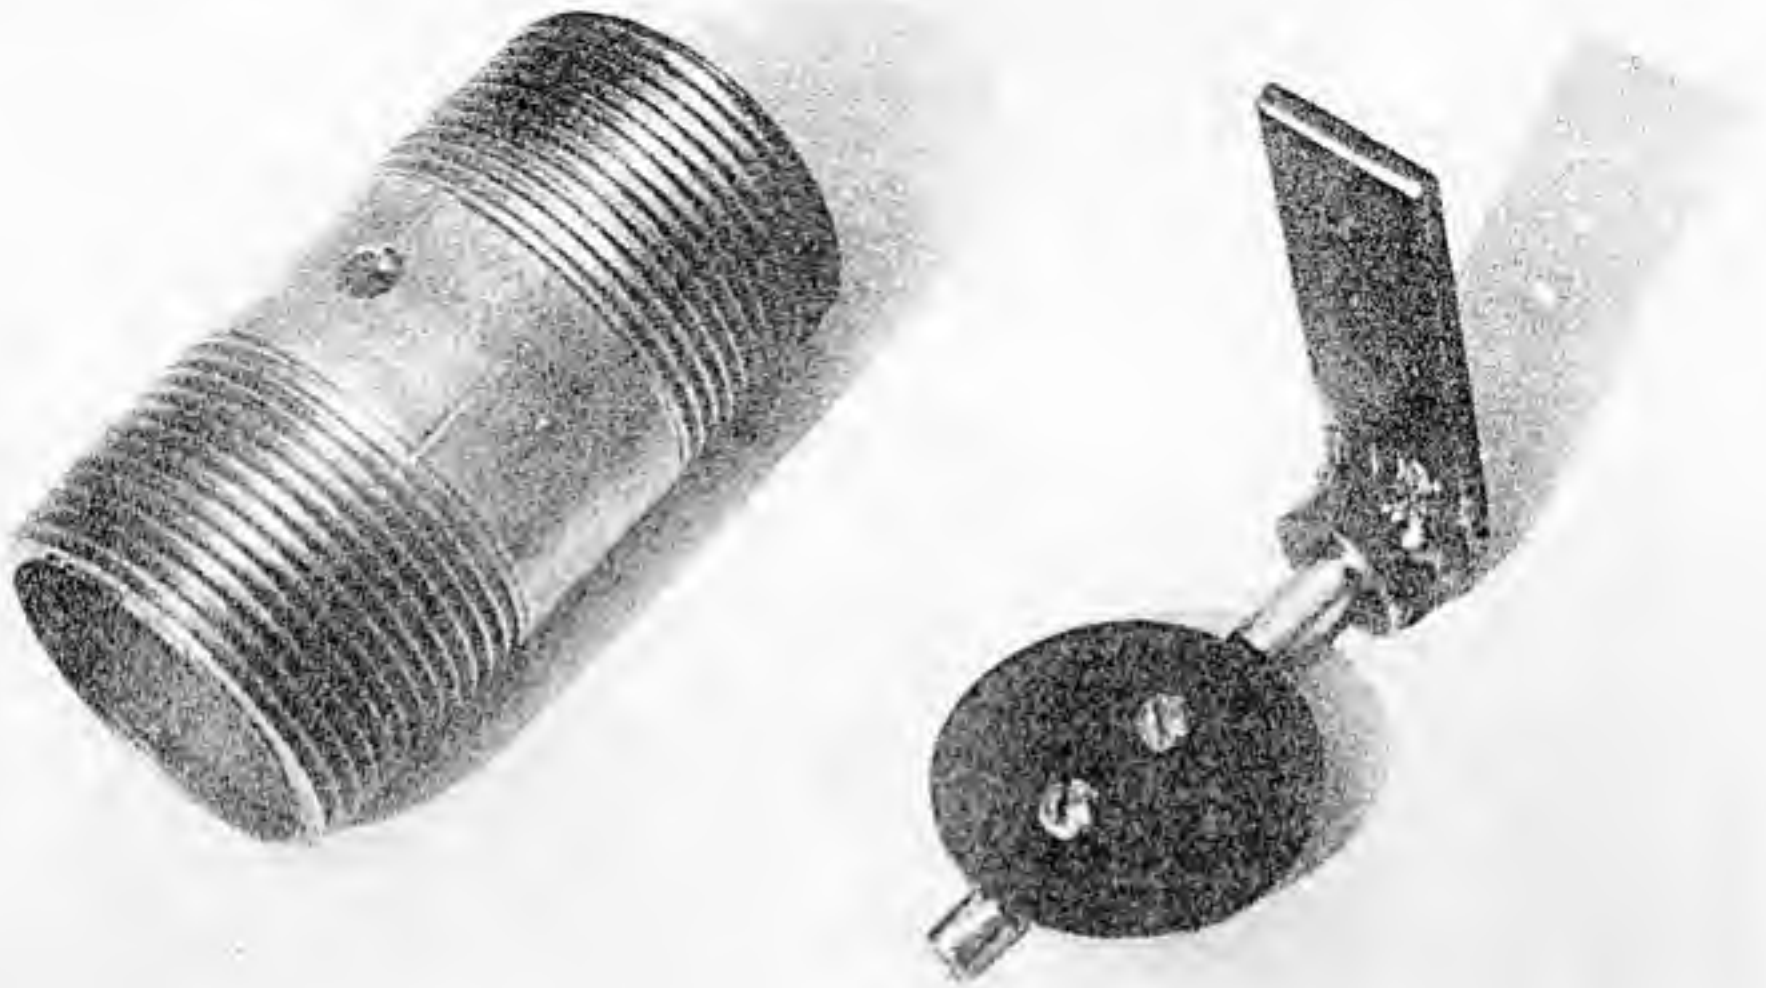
Butterfly valve assembly. Note that the valve has been assembled outside of the valve body for clarity.
